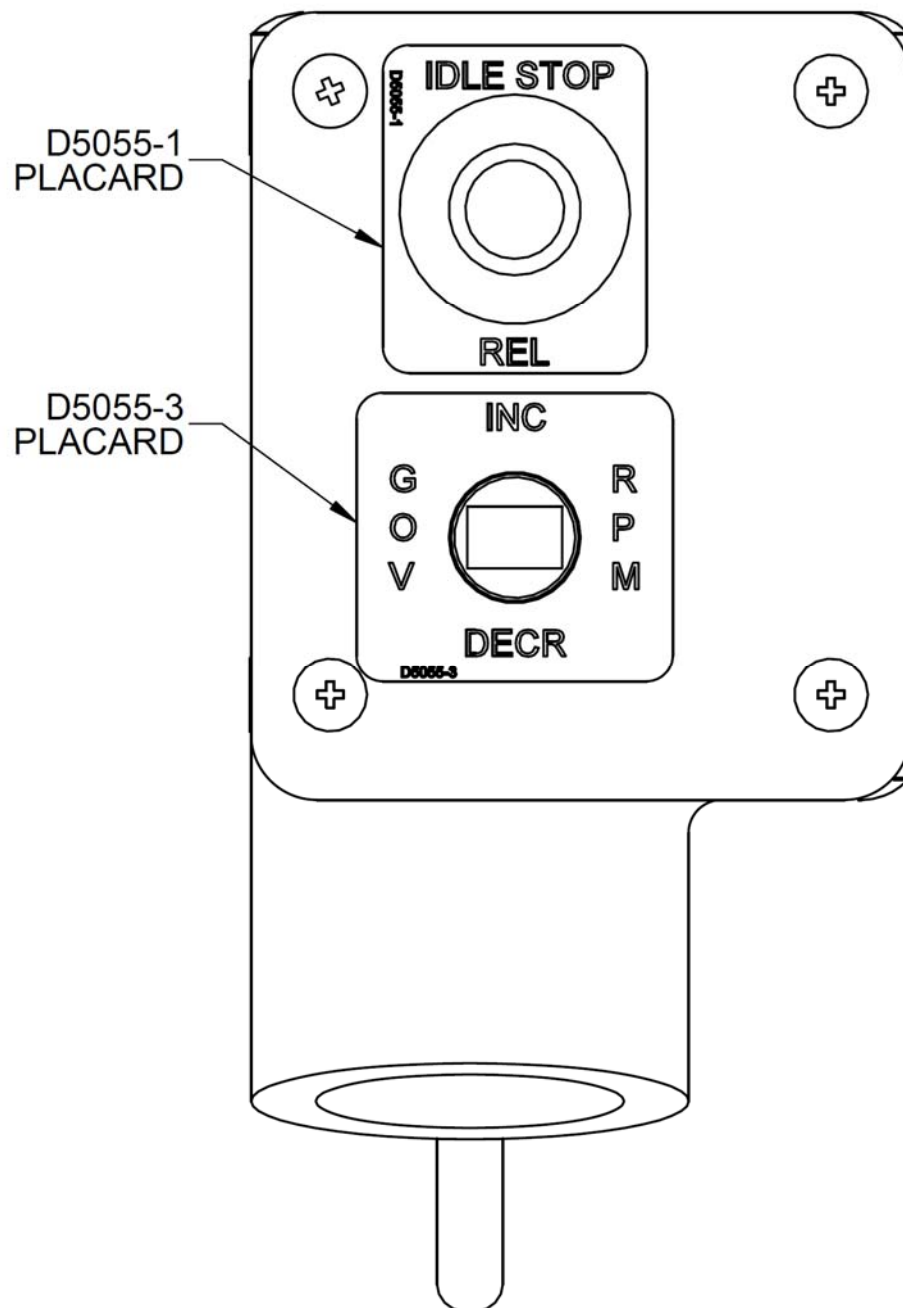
DXXX-803-211/-213/-219 Co-Pilot Collective Head Front View
